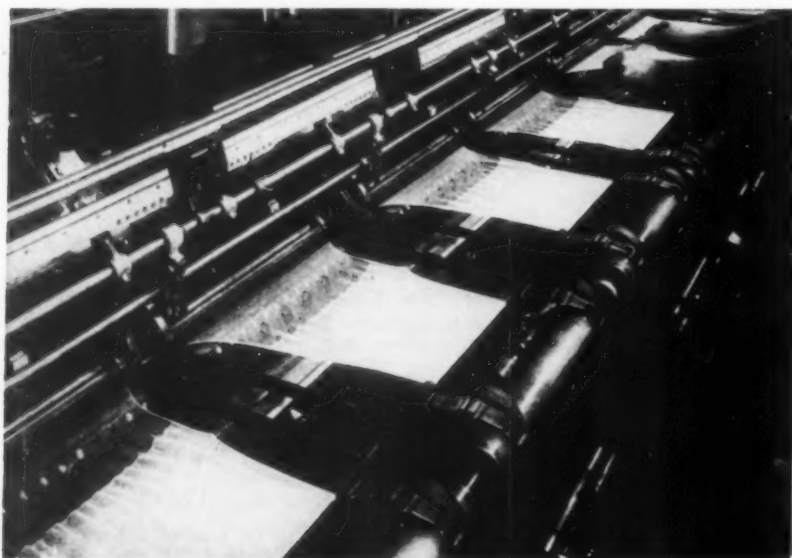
Nylon hose making machine requiring accurate braking control to maintain proper thread tensions
